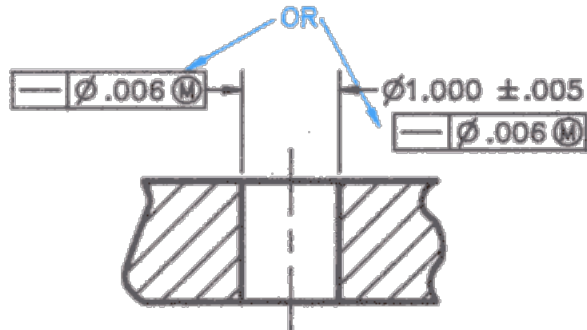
Form tolerance can be applied to internal features such as holes.
